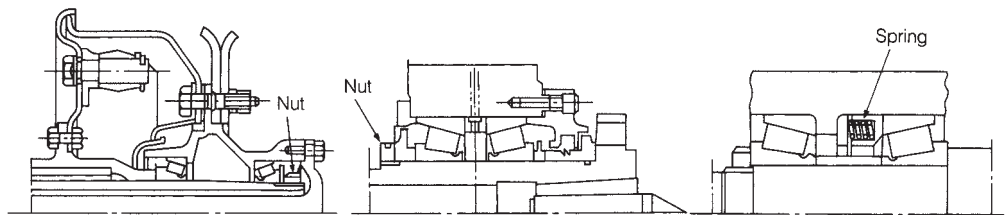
DB Arrangement whose Clearance is Adjusted by Inner Rings.
